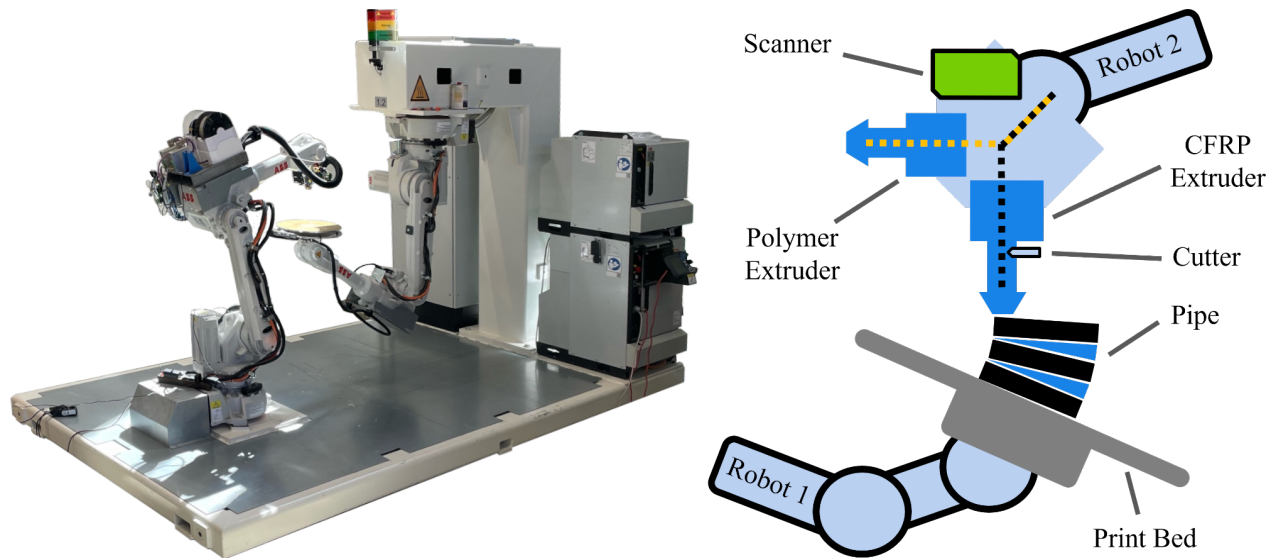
Left: 12-Axis printing system using two robots. Right: Print head with labeled components.
